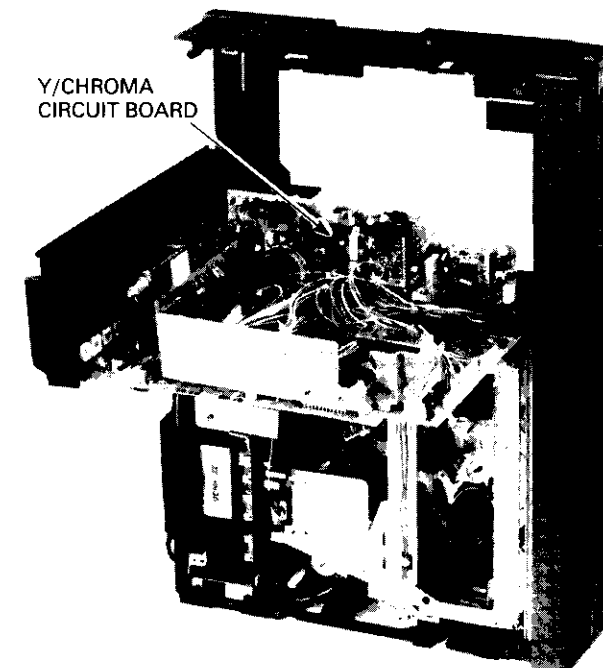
Ready to Adjust Y/Chroma Circuit Board
